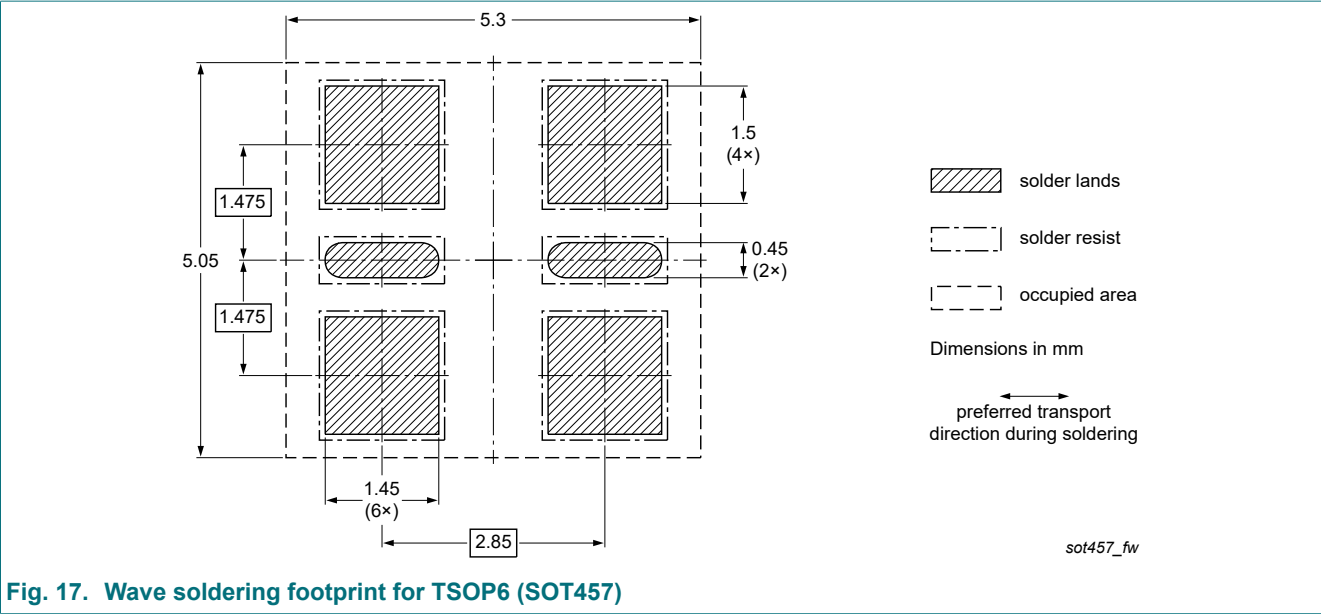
Wave soldering footprint for TSOP6 (SOT457)
